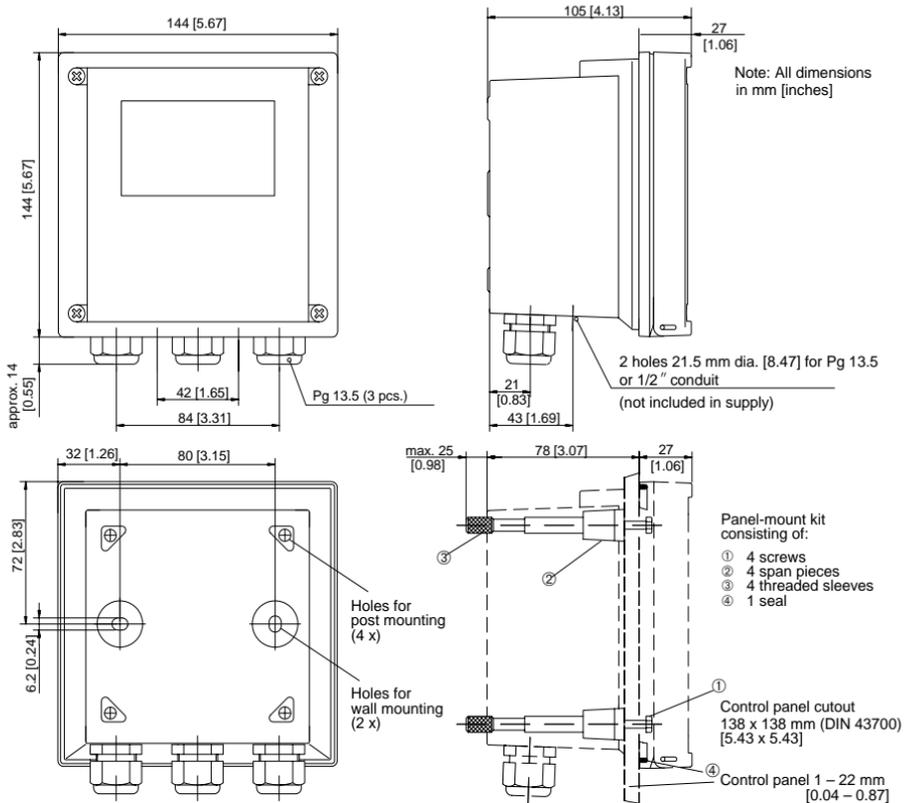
Dimension drawing for Transmitter, mounting diagram and P/N 51205990-001 panel-mount kit
